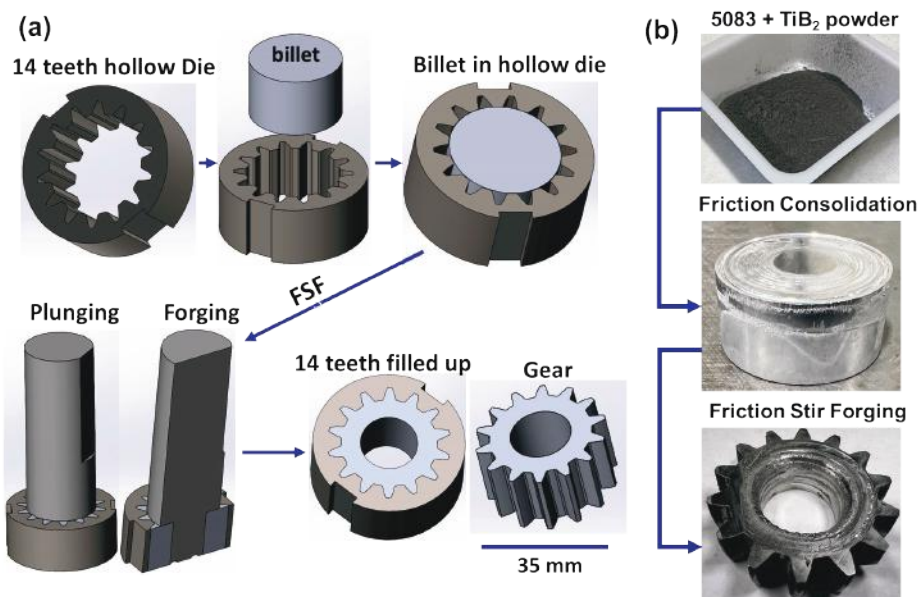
(a) Schematic of step-by-step FSF process and (b) combined friction consolidation and friction stir forging for the fabrication of the composite gear. Source: PNNL.
